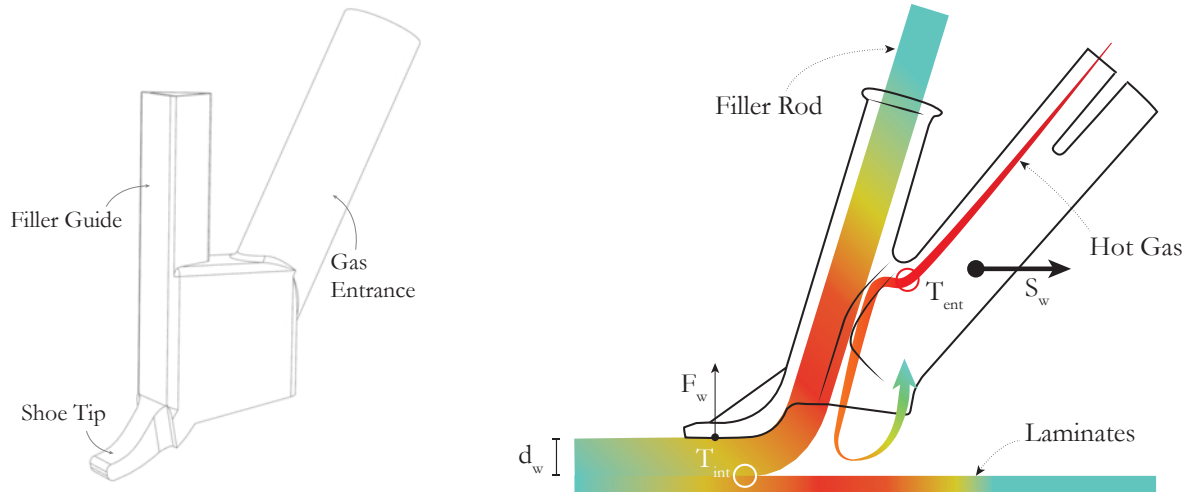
Speed welding shoe for manual hot gas welding.
